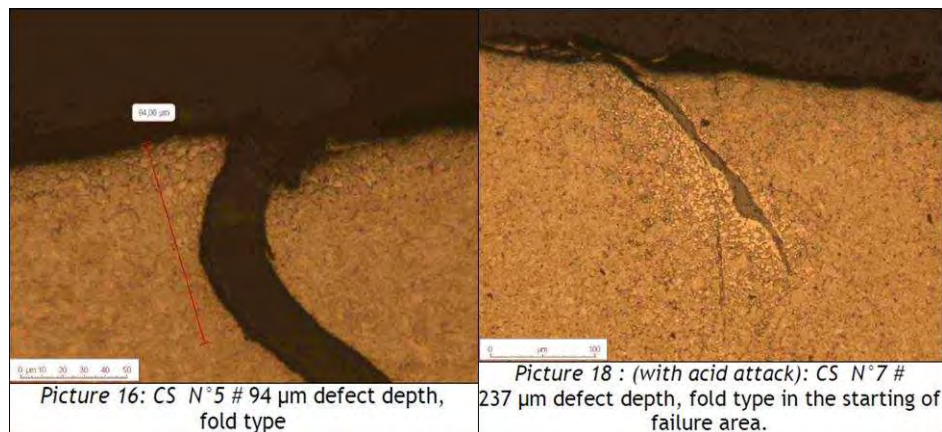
53SiVMo8Nb UFG spring – Surface fracture analysis.
